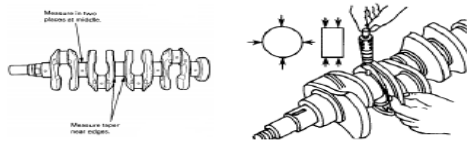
Measurement of crankshaft main journal diameter and clearance [7]
